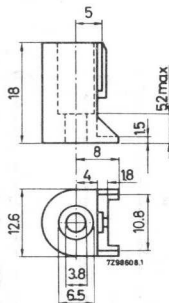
Thermoplastic mounting bracket 4332 026 11110
